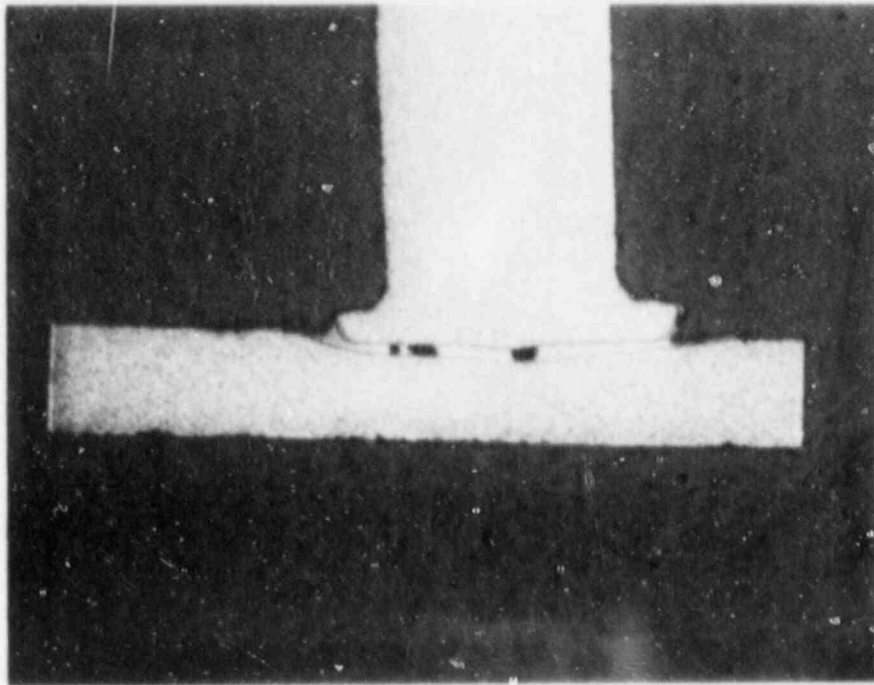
Cross-section of stud weld to cylinder material (8.5x)
